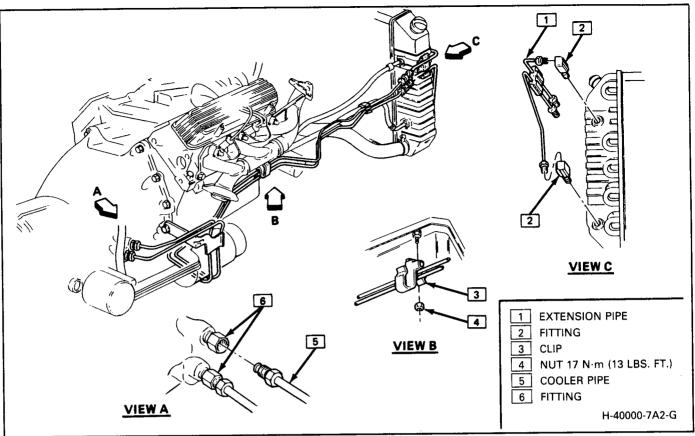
Oil Cooler Pipe Routing LC2 VIN 7
